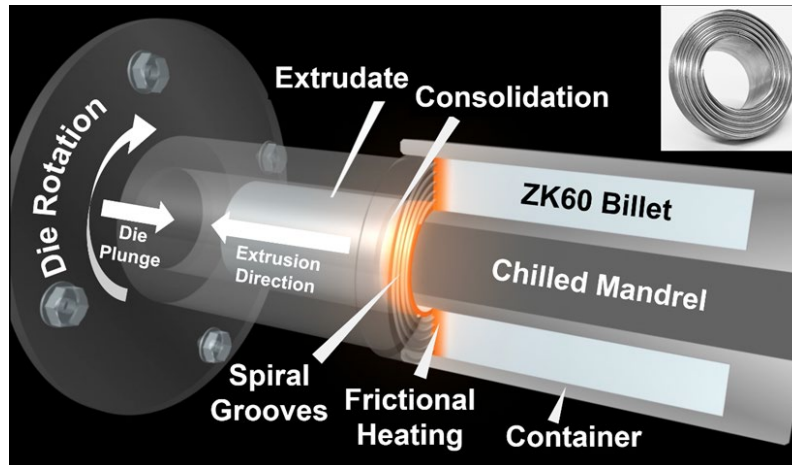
A.2.1. Cross-section of tooling showing a direct tubular extrusion of the ShAPE™ process. Source: PNNL.
